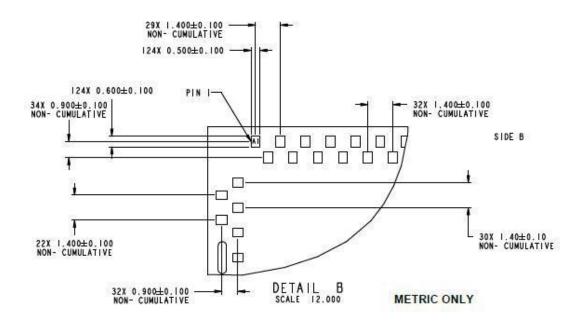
WL501 module pinout dimensions-Detail B (in mm)
